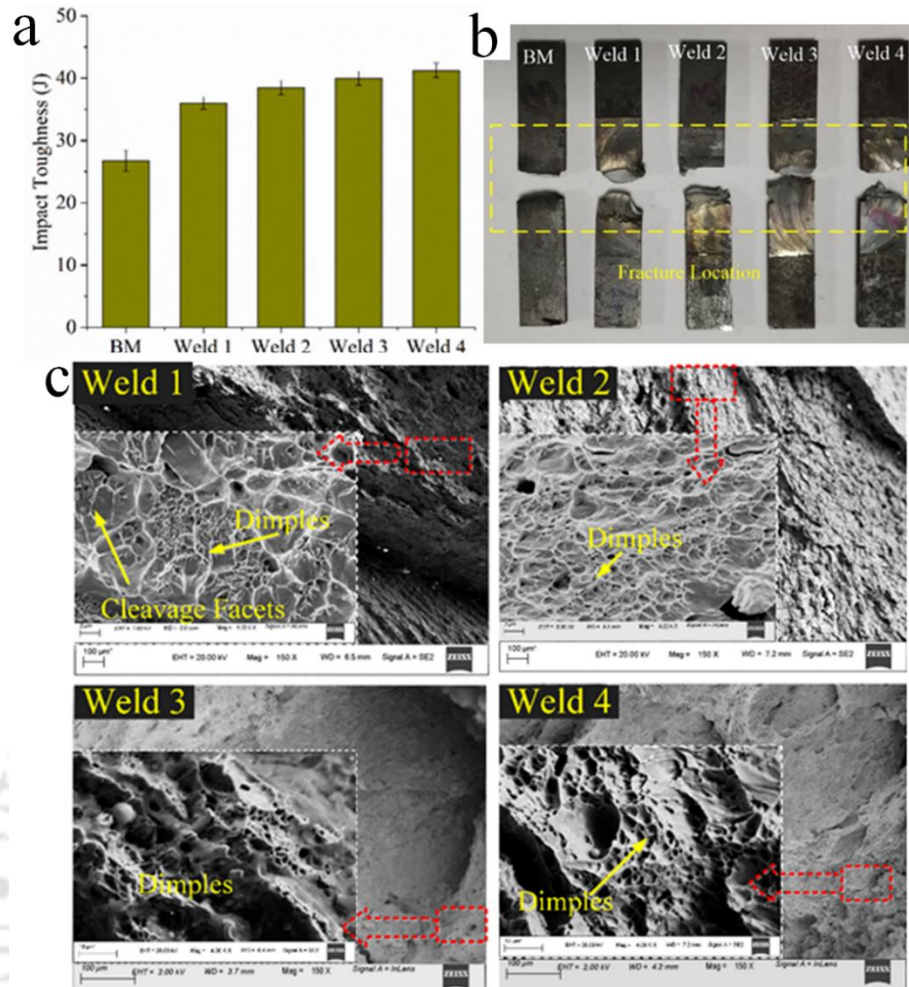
Impact test results: (a) comparison on impact toughness of welded specimen with the base material, (b) fracture location of impact specimens, and (c) fracture surface of impact specimens
